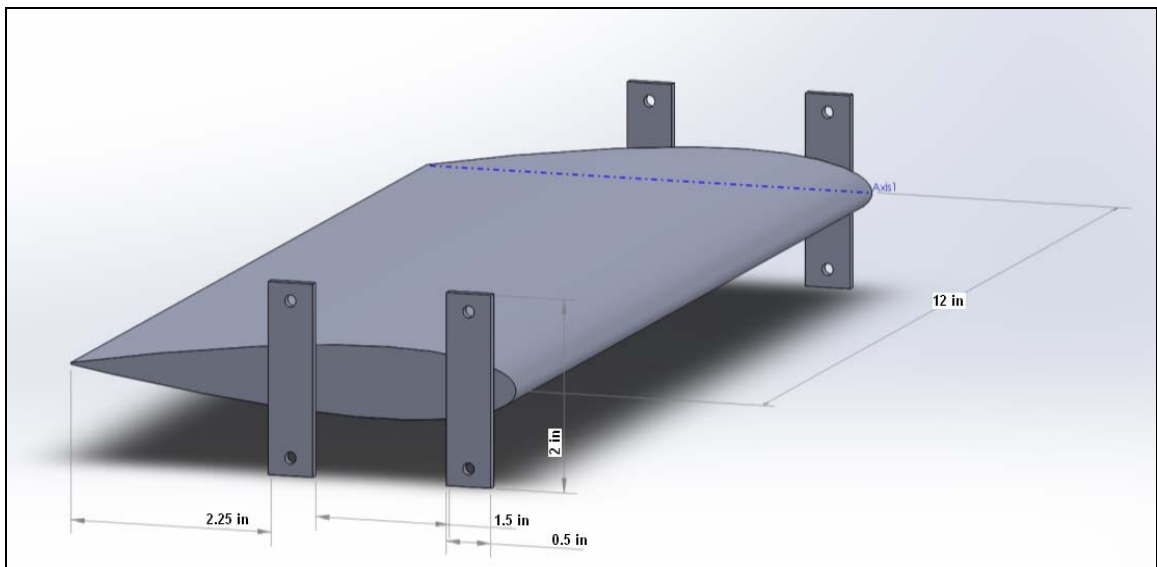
SOLIDWORKS assembly drawing of the airfoil and plate support (2nd experimental set-up)
